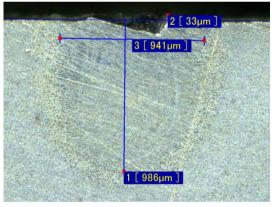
Picture of blind weld with 4 mm defocus
